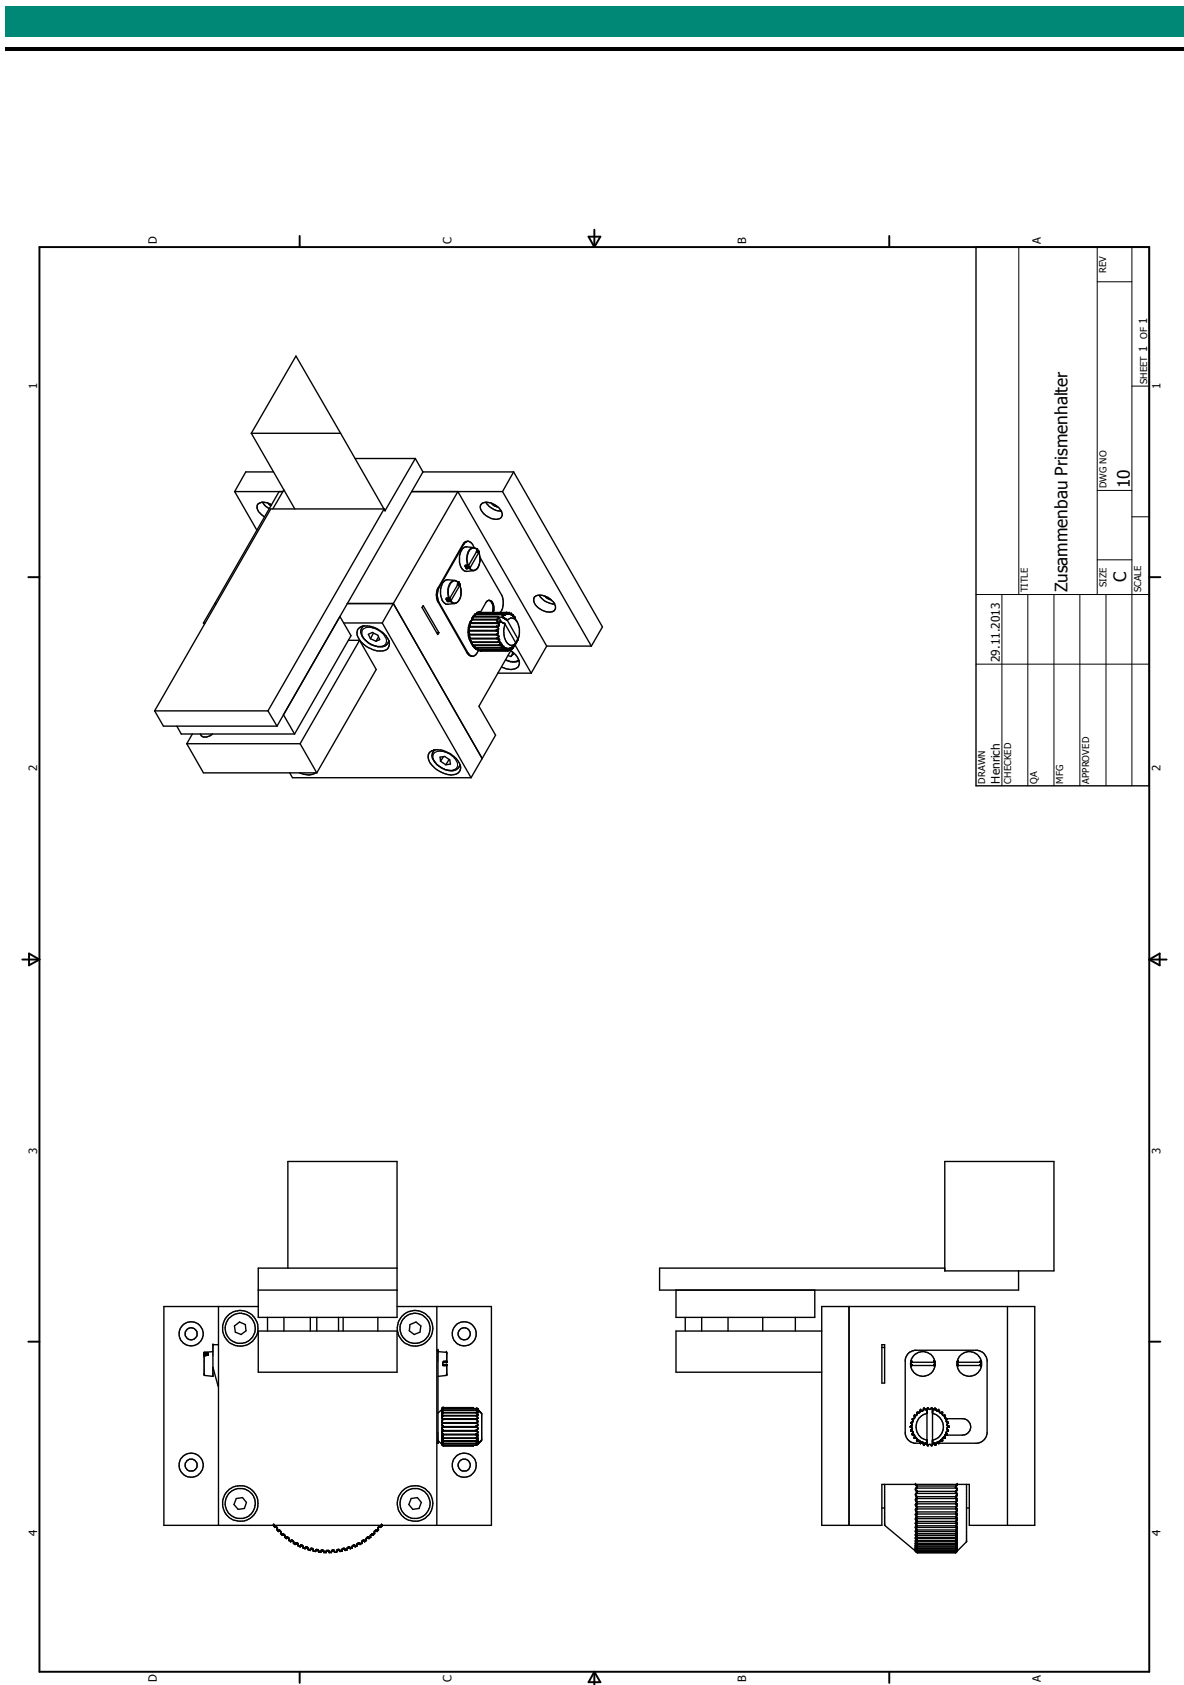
Technical drawing of the mounted prism on the vertical stage.
